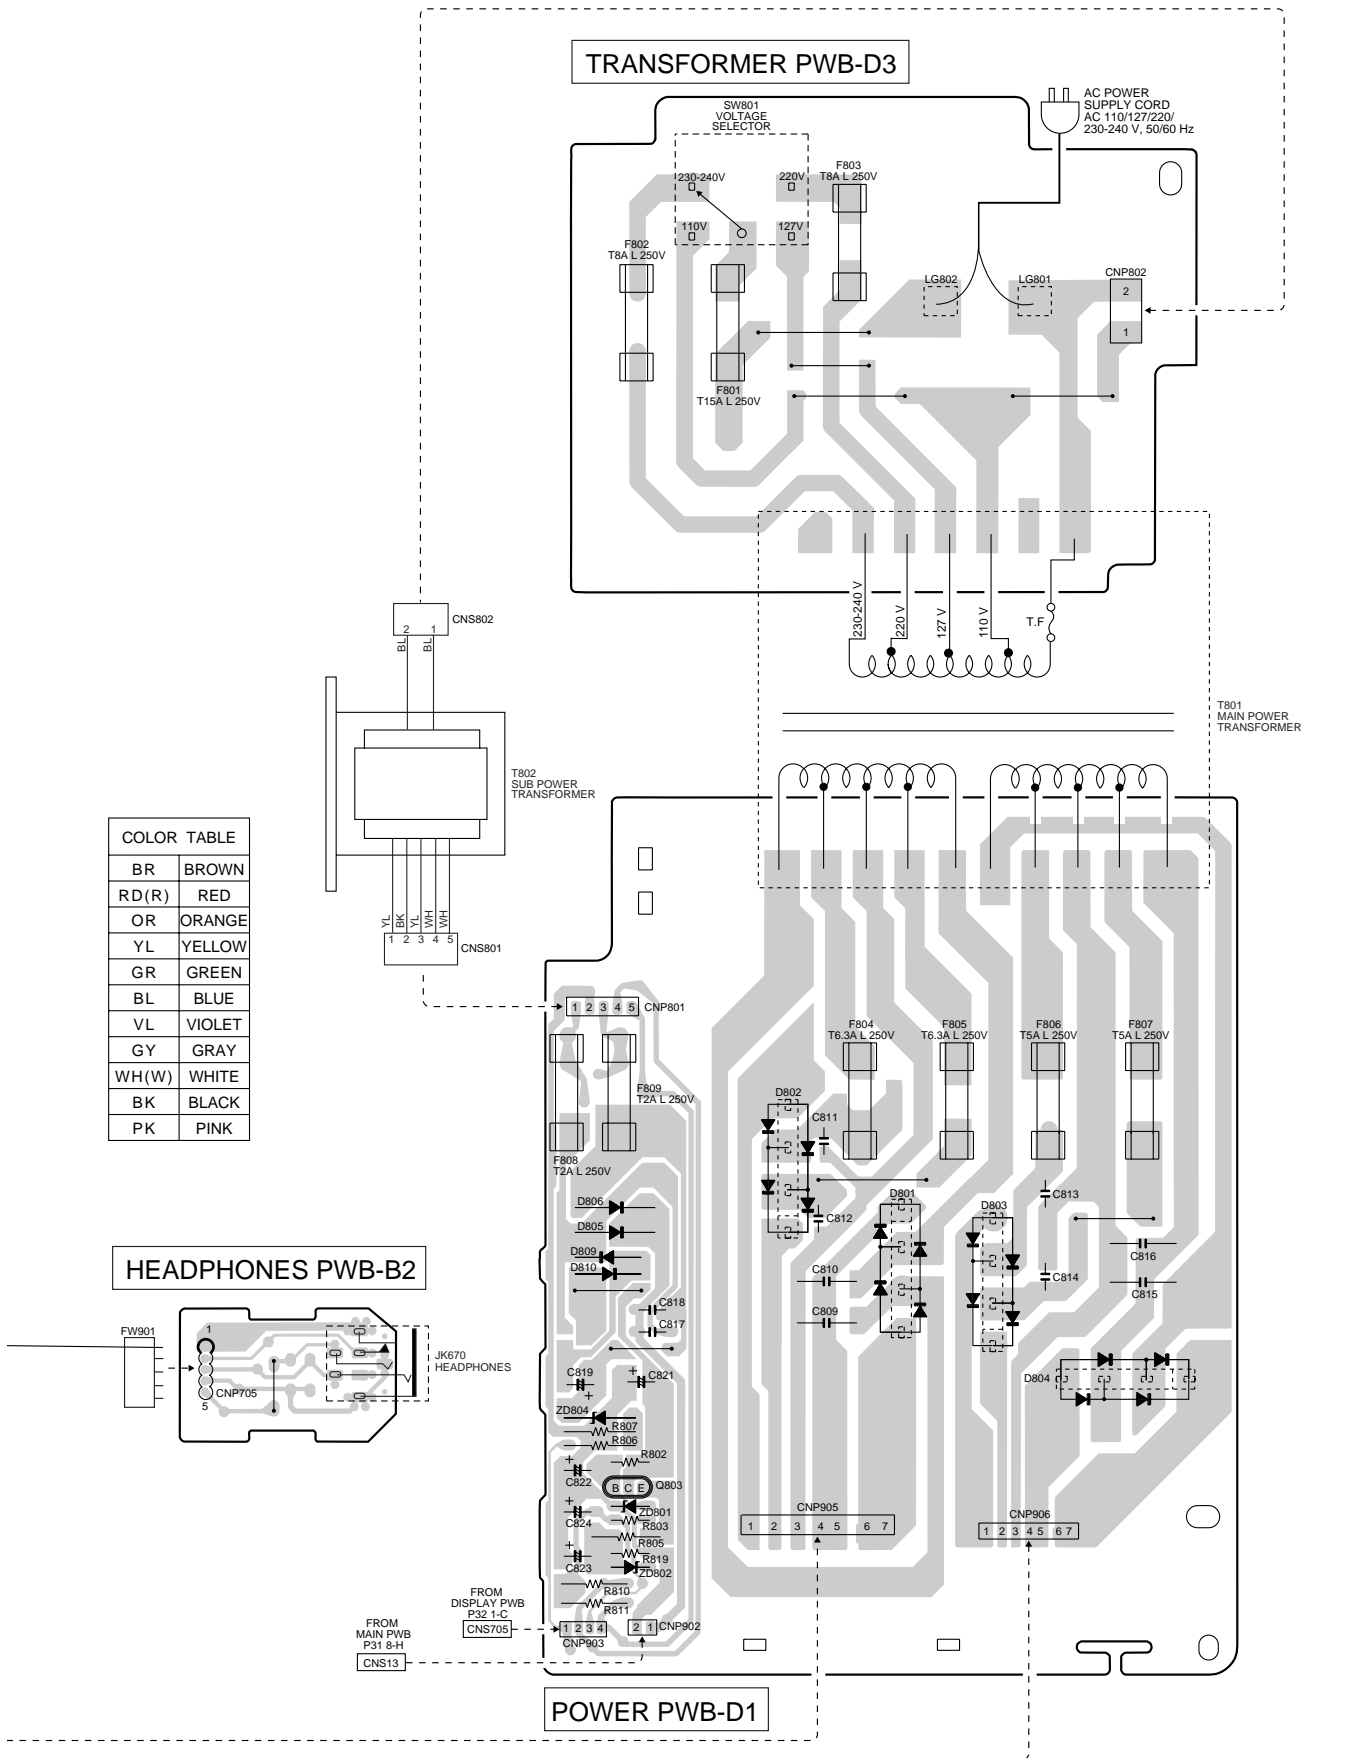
WIRING SIDE OF P.W.BOARD (7/9)
